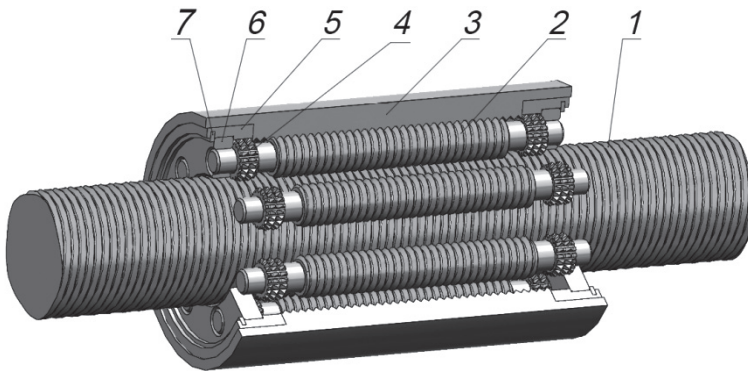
Planetary roller screw structure; 1 – screw, 2 – roller, 3 – nut, 4 – satellite toothed wheel, 5 – end plate, 6 – sun toothed wheel, 7 – retaining wheel
